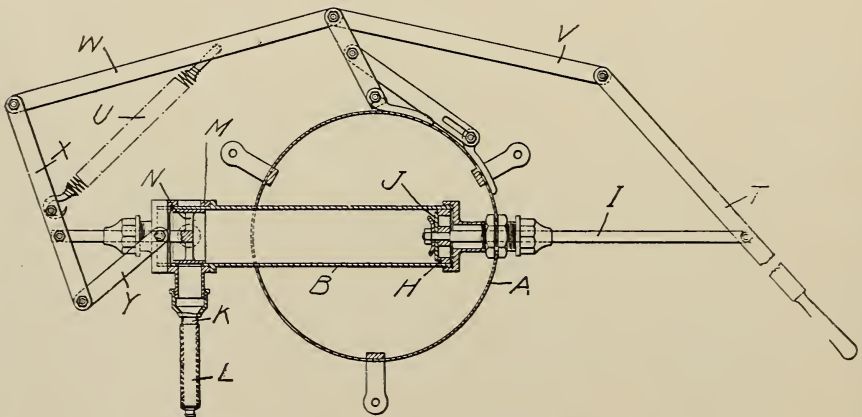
PLAN VIEW OF THE BRETT MACHINE.
